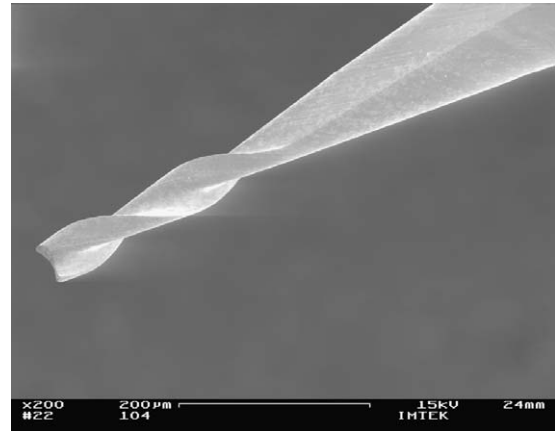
Carbide steel milling cutter with a diameter of 50 μm .
